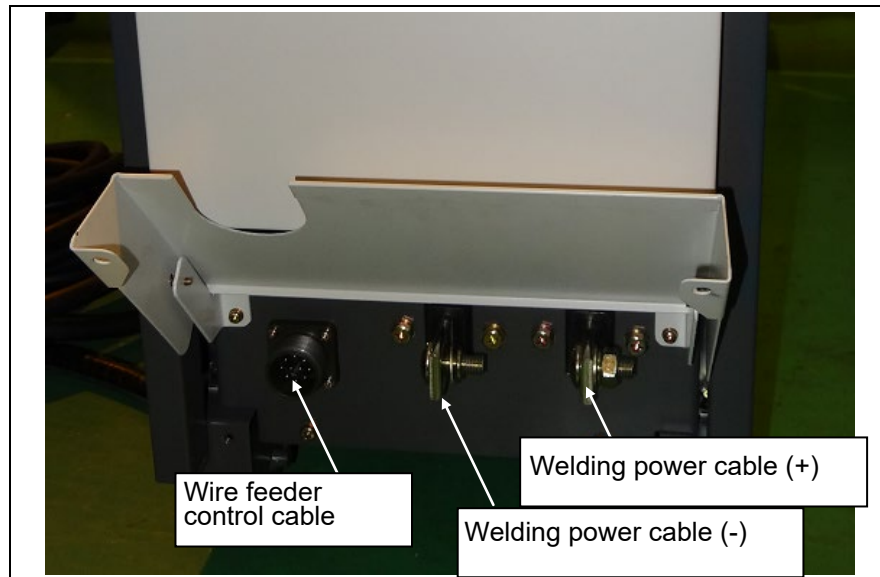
(a) Connection of welding power supply FH350i, FH350iP (1/3)
